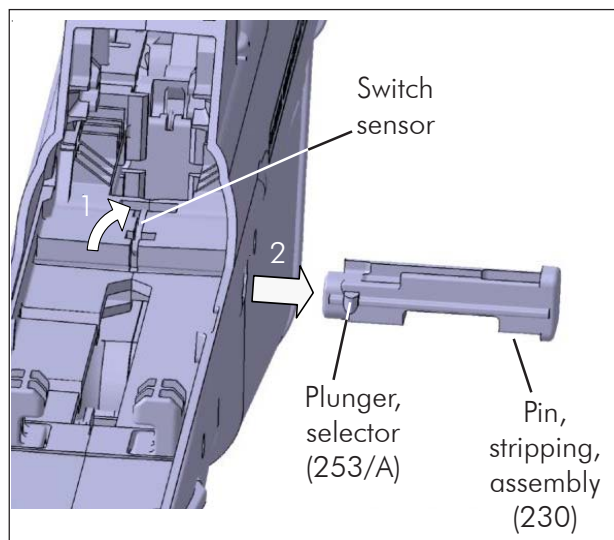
z - Removal of the pin, stripping, assembly (230)
